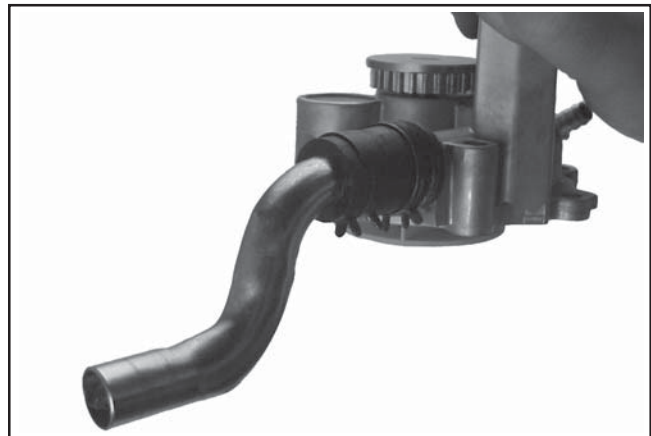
Installing O-Ring in Crankcase for Water Pump.
